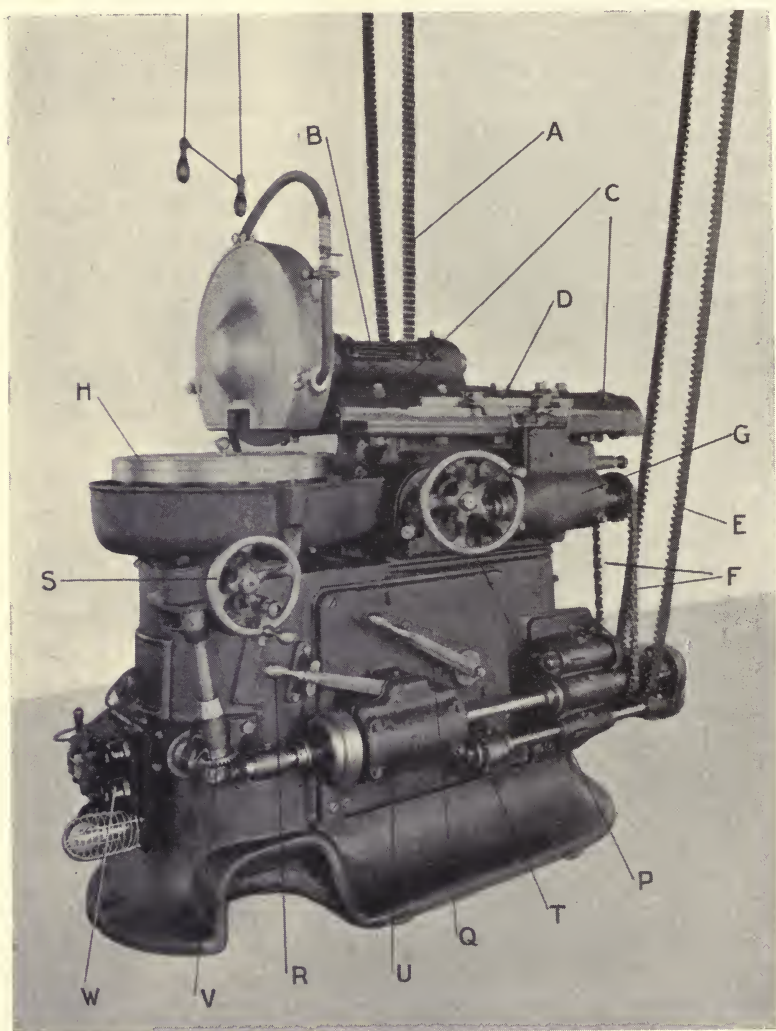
SURFACE GRINDER—HANS RENOLD
